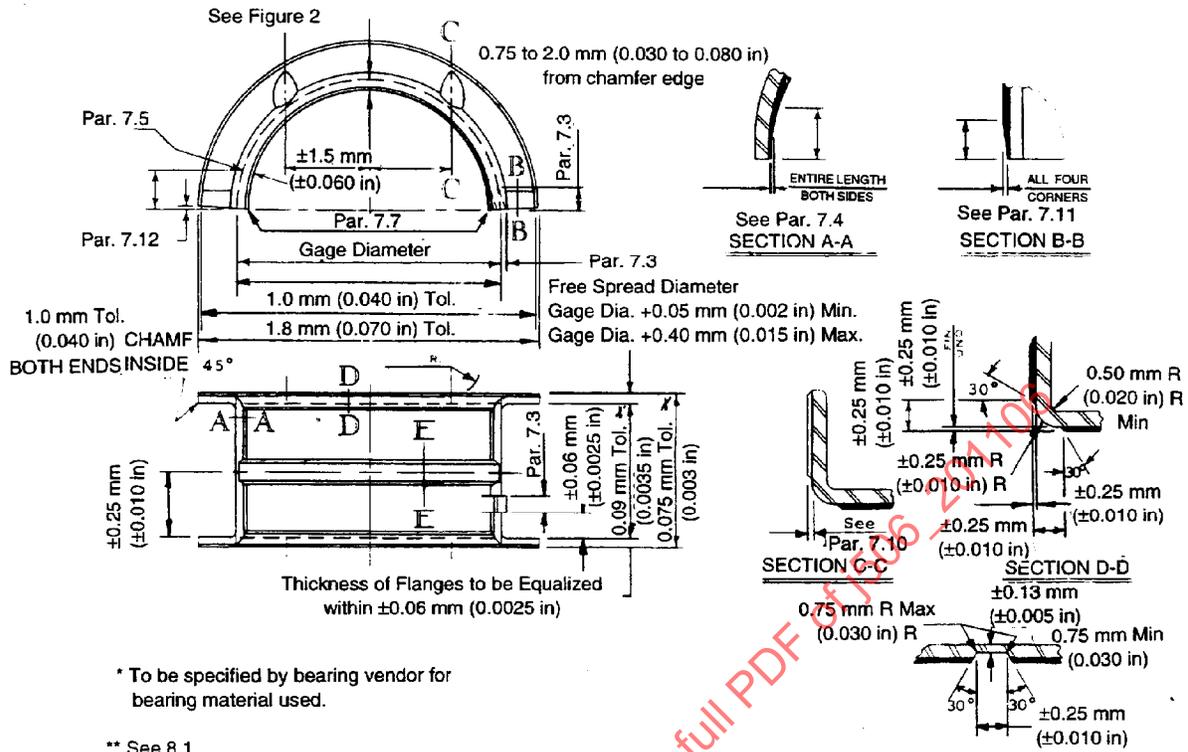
STANDARD TOLERANCES OF FLANGED BEARINGS
